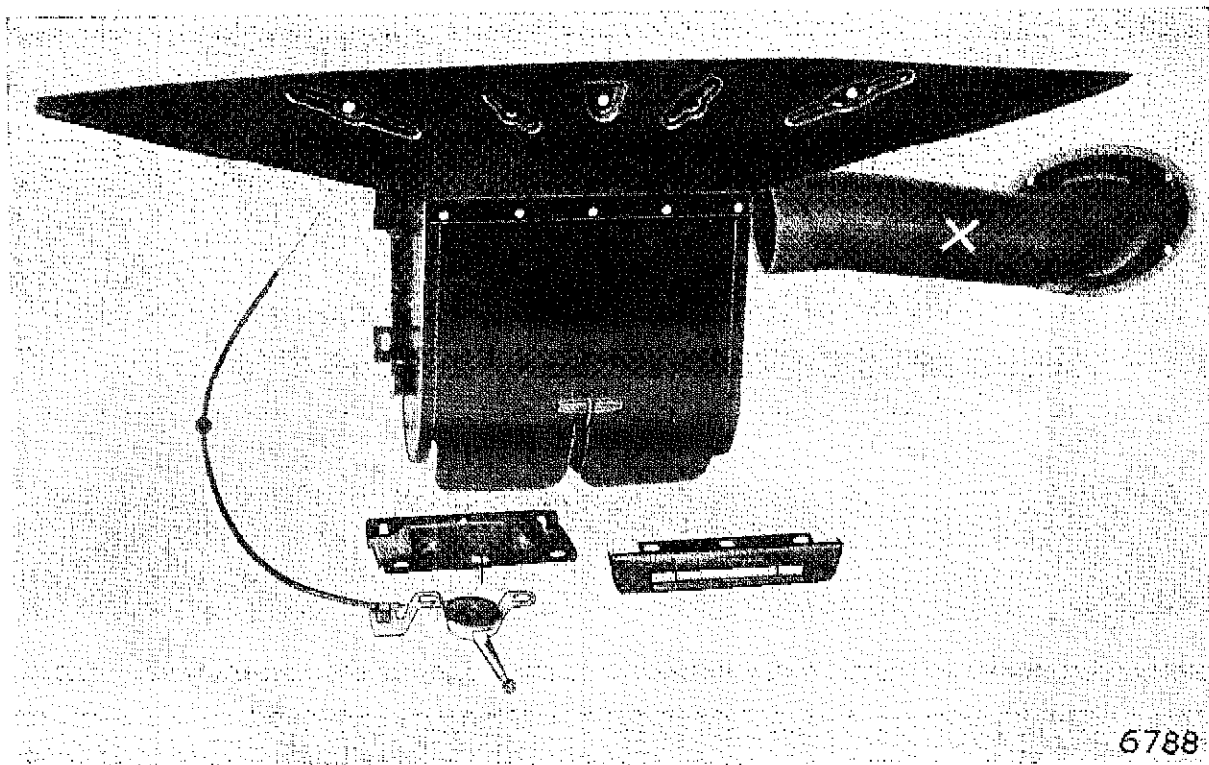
Heater assembly, control and air inlet pipe "X" (if fitted)
